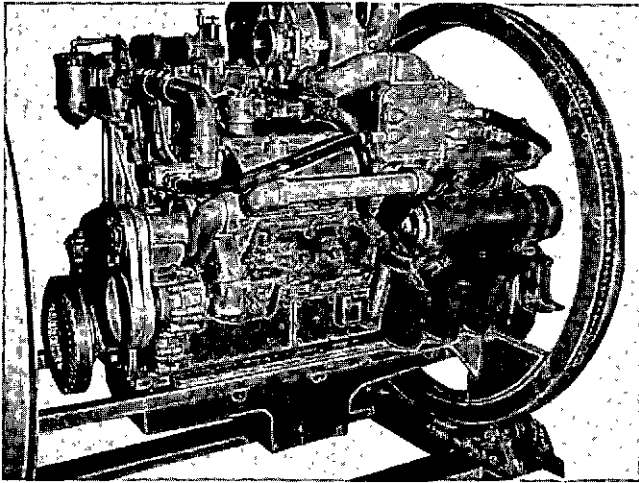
, V40039. Engine mounted on ST-412 Engine Stand
